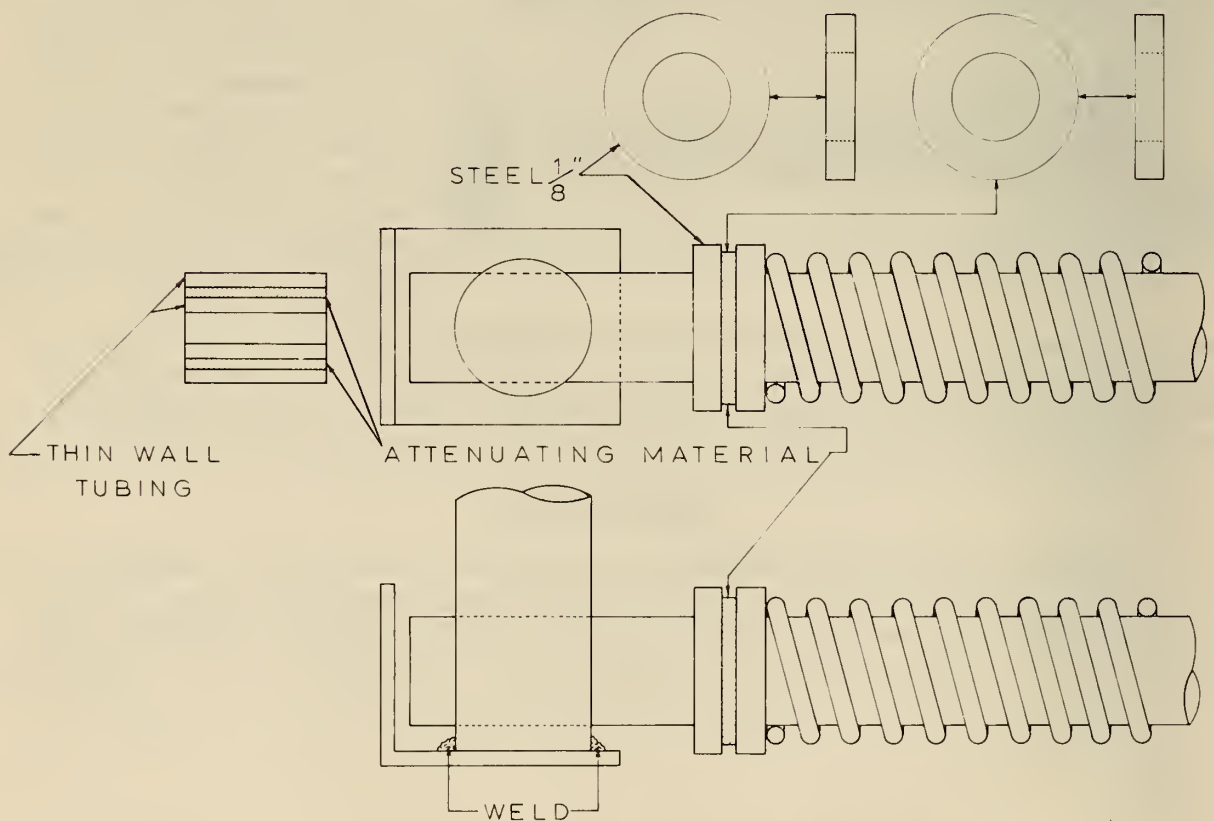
Drawing of tail roller and tension spring noise abatement.
